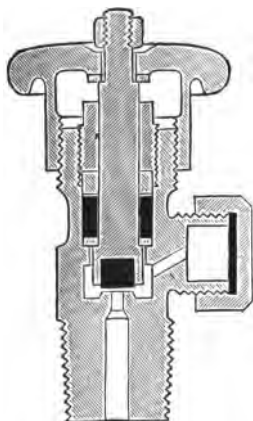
Cross section of high pressure valve for oxygen bottle.
